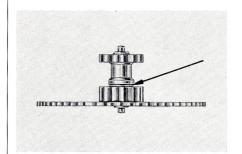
shows how easily the mainspring barrel (1S) is removed without disassembly of the self-winding mechanism. The mainspring arbor must make six full turns before the brake spring slips, which represents a total running time of over 40 hours. An unbreakable and life-time lubricated mainspring is used. Therefore, periodic cleaning of the barrel and mainspring is unnecessary.
